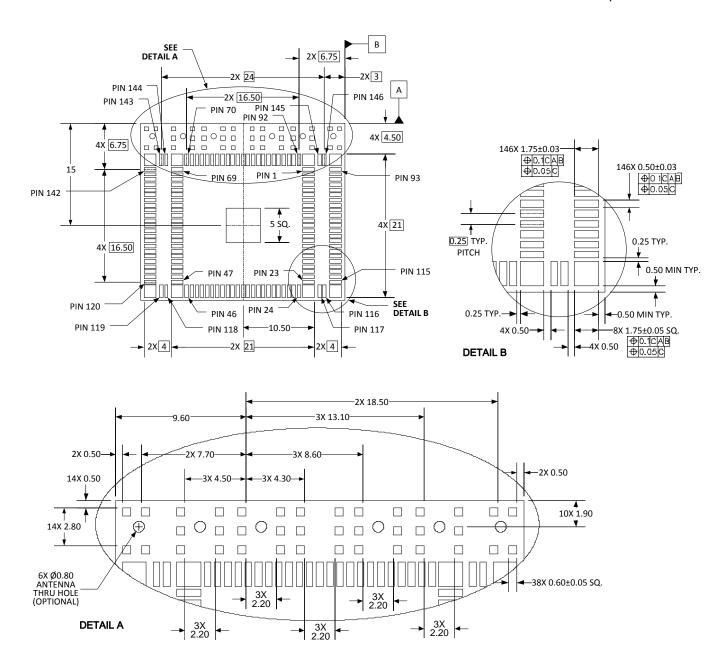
M.2 Type 3026-S3 Mechanical Outline Drawing Details Example
